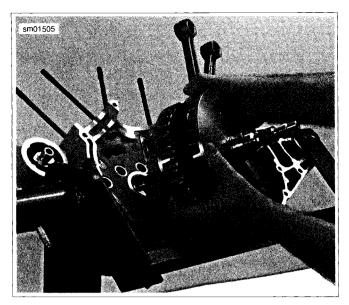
Removing Flywheel Assembly From Right Crankcase Half (typical)
